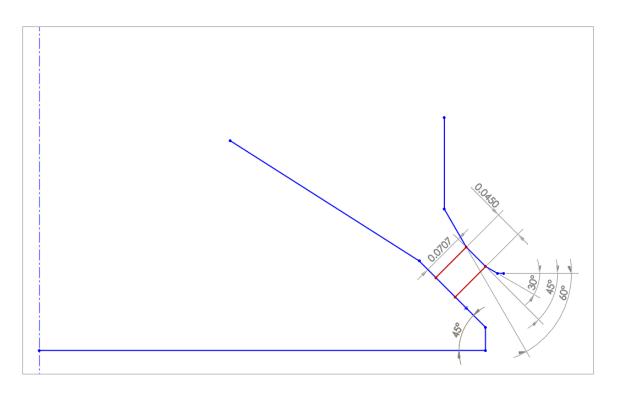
Drawing of the sand-core port valve curtain area, including the valve outline (bottom), seat outline (top) and the location of the minimum area (red)
